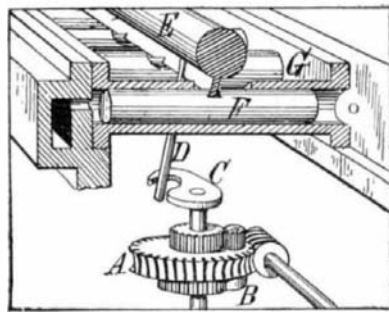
DETAILS OF SLIDING CYLINDER PUMP.
